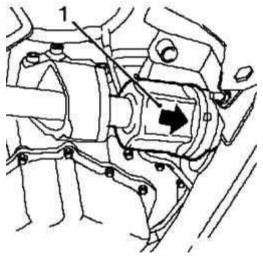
Withdrawal of the right shaft: 1 - drive shaft
